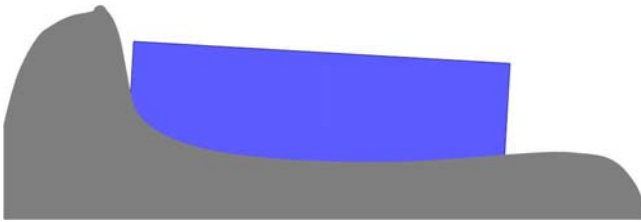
Brake Shoe Contact with Tread with Worn Flange
